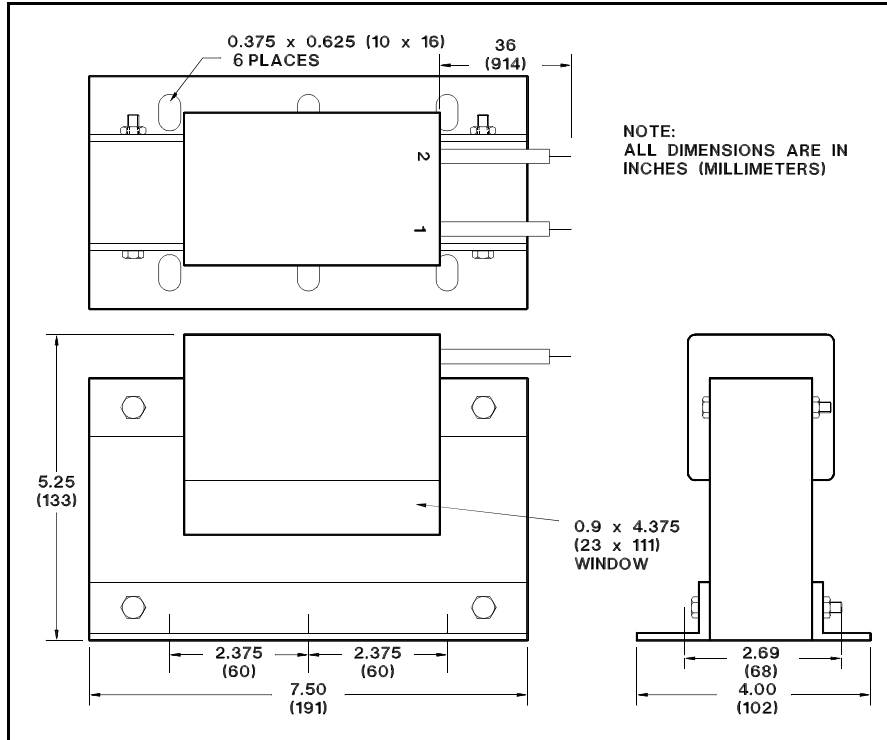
Outline Drawing - Current Transformer BE 21331-001
